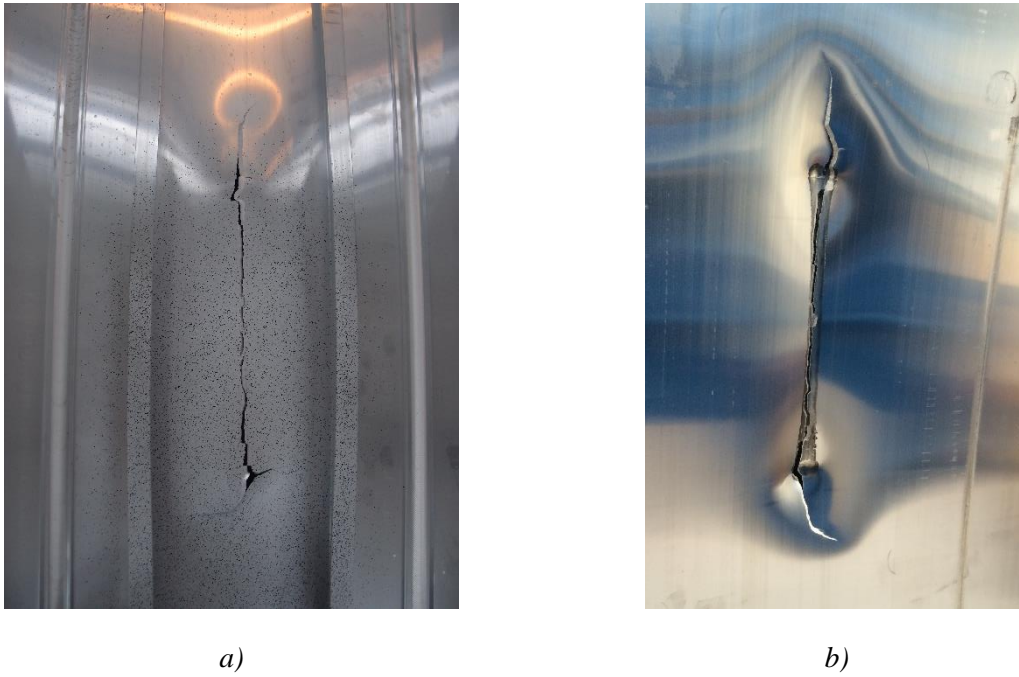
a) Fracture in QSLE1 from behind and b) top view of fracture on QSLE2
